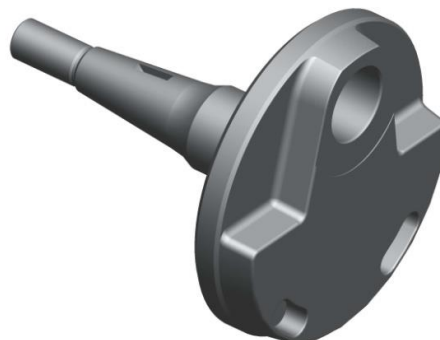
THE SAME OUTER CRANKSHAFT DONOR THROW POST-MACHINING TO BALANCE THE CRANKSHAFT DYNAMICALLY.
